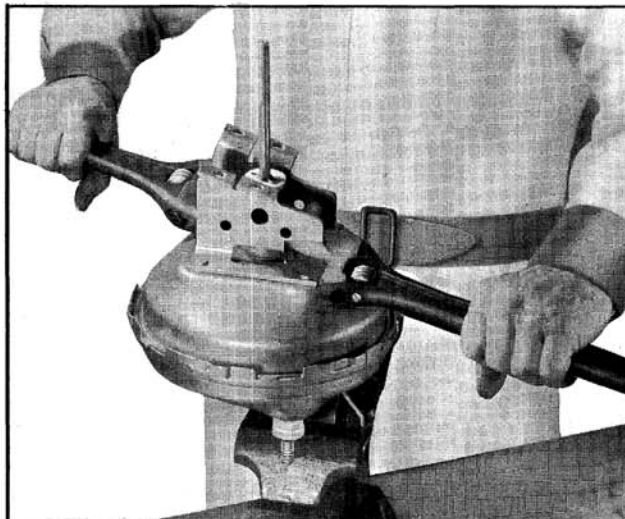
Separating Housings (with a Mounting Bracket)
